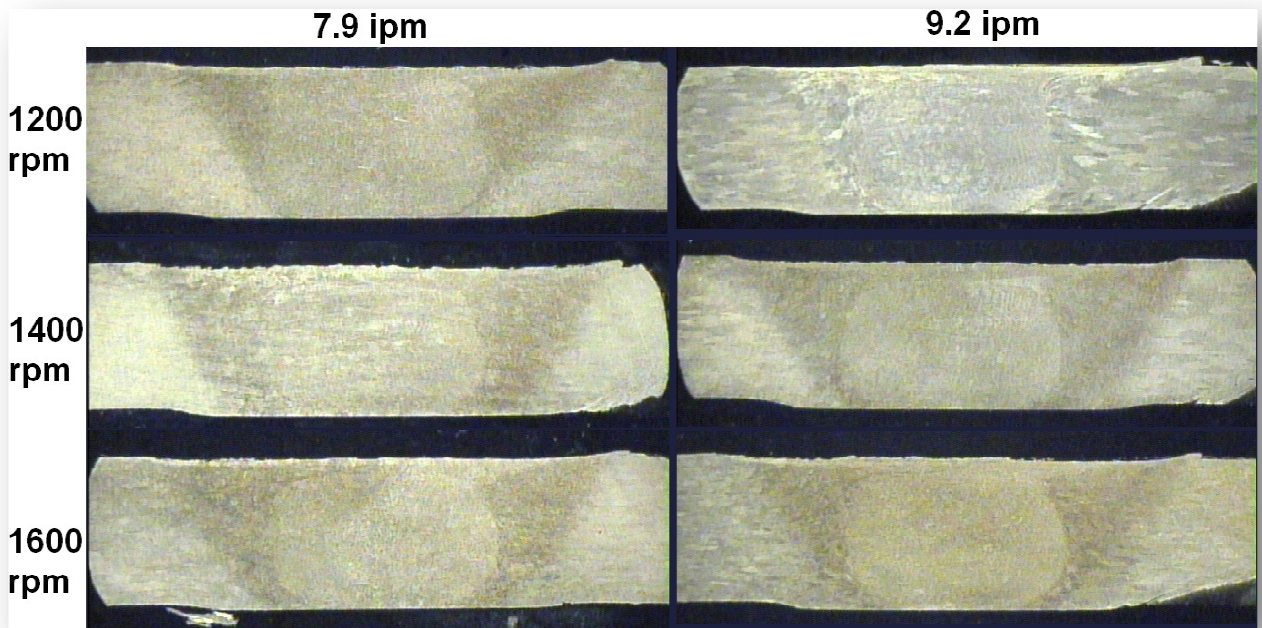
Macrosections of welds made at 7.9 and 9.2ipm with the wide probe tool.
